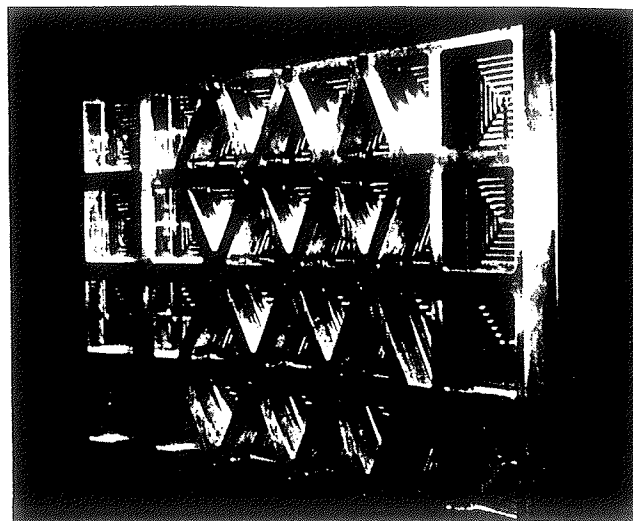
A picture of Isogrid panel NC-machined for the prototype vacuum shell. R&D.
